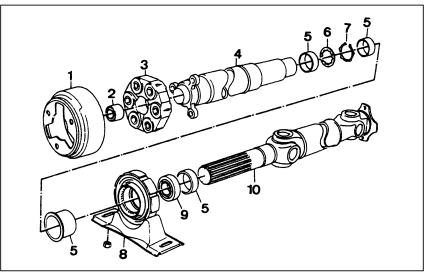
Cardan shaft (4) with flexible coupling (3), centre bearing (8) and prop shaft (10) with double universal joints.
